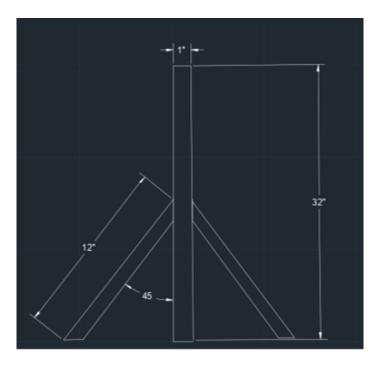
Mockup design dimensions, showing the dimensions of the parts that make up our base.
